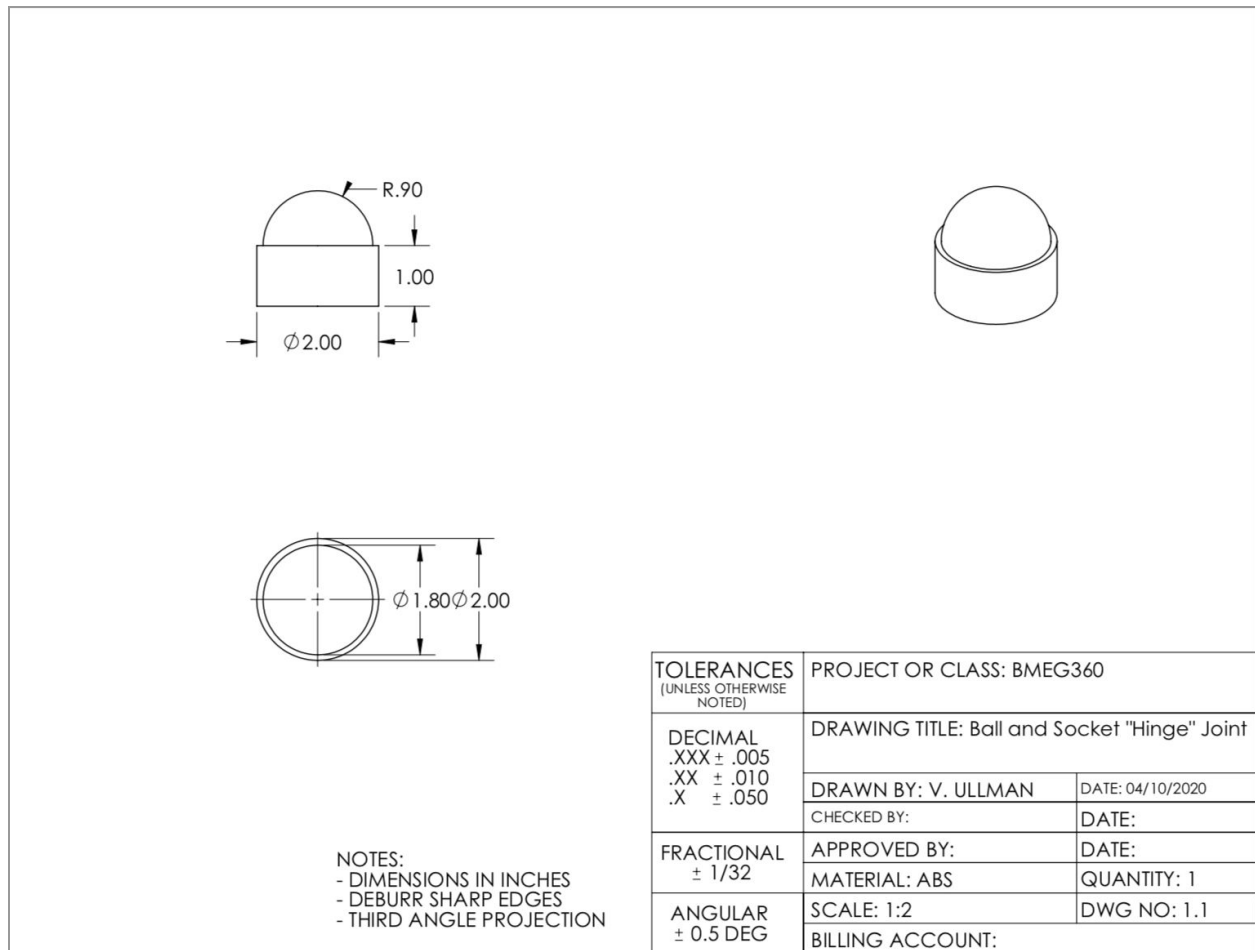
Detailed engineering drawing of ball-and-socket joint. The ball has a radius of 0.90" and sits in a cylindrical socket with a radius of 1.00" and a height of 2". This socket sits atop the cross hand grip shown in Figure 10.
